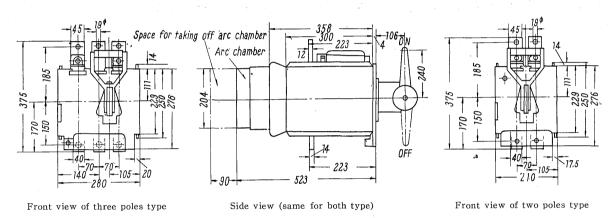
Outline drawing of air circuit breaker, type RF 913-1,000
